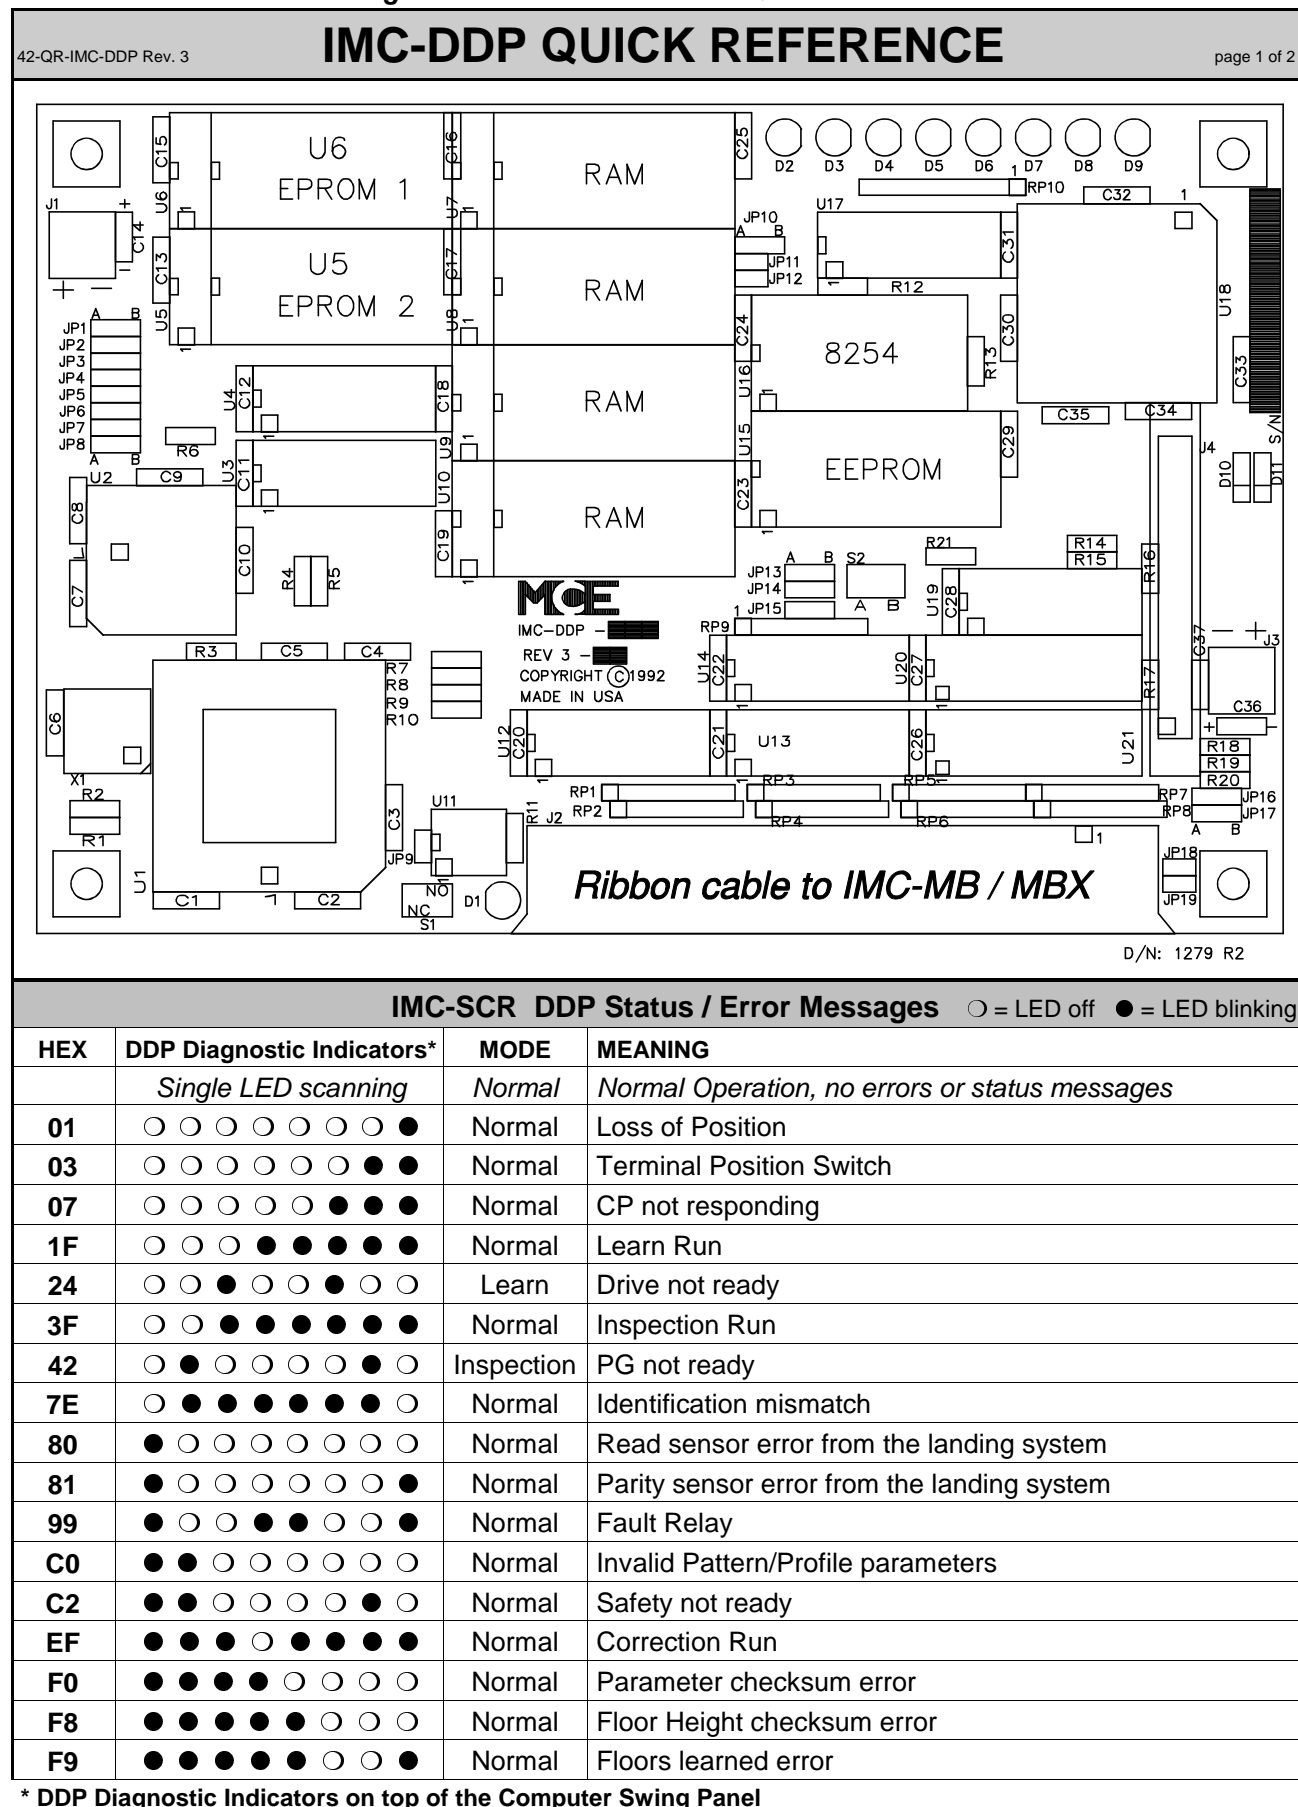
IMC-DDP-x Digital Drive Processor Board Quick Reference
